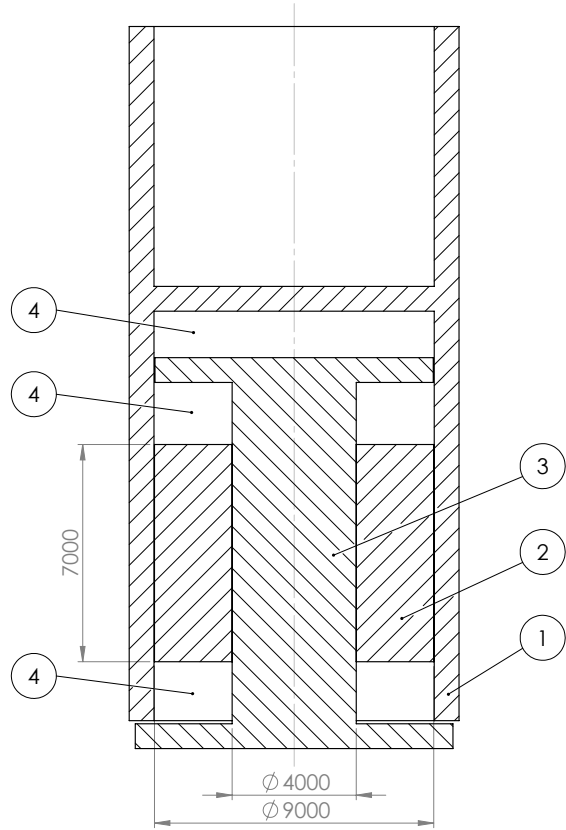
Section view P-P: Sketch of the topology of the generator and bearing assembly. None of the dimensions are true, except for the generator stator, that are approximate numbers for current design revision.
